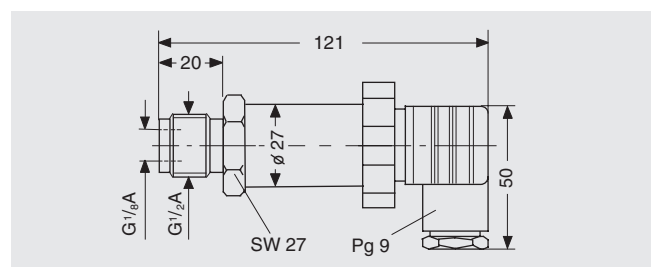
/166 Pressure transmitter 7MF1563, dimensions
